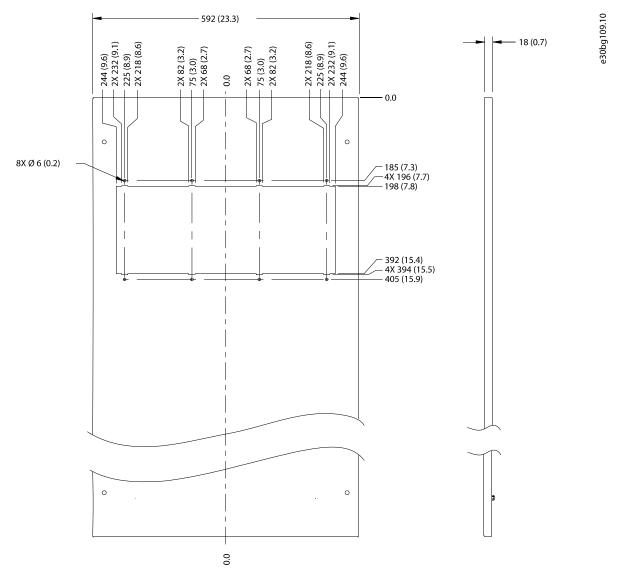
Vent Dimensions for Backplate in 600 mm (24 in) Enclosure
